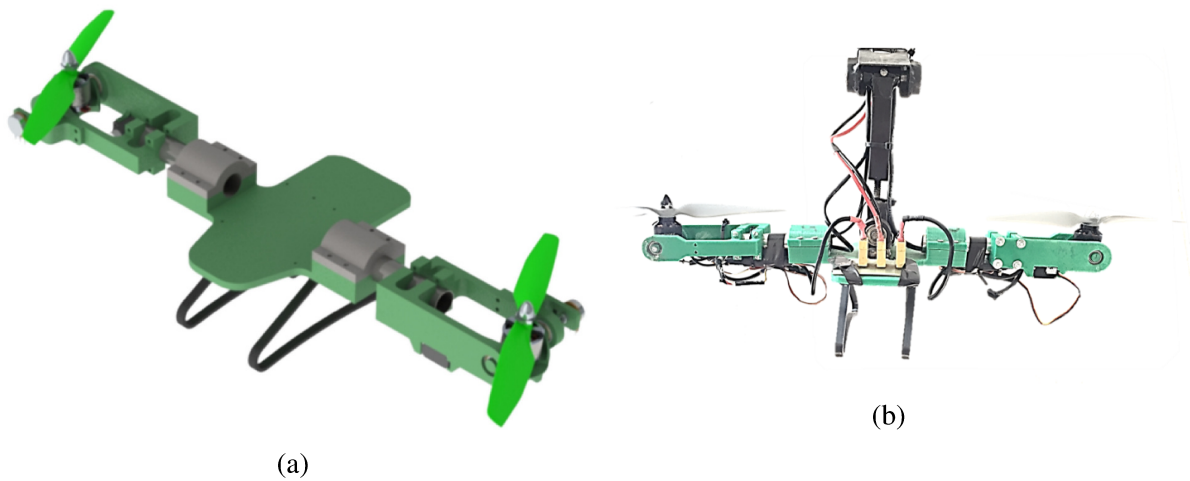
Tilt-rotor bi-copter CAD model. (a) CAD Model. (b) Final assembly.
